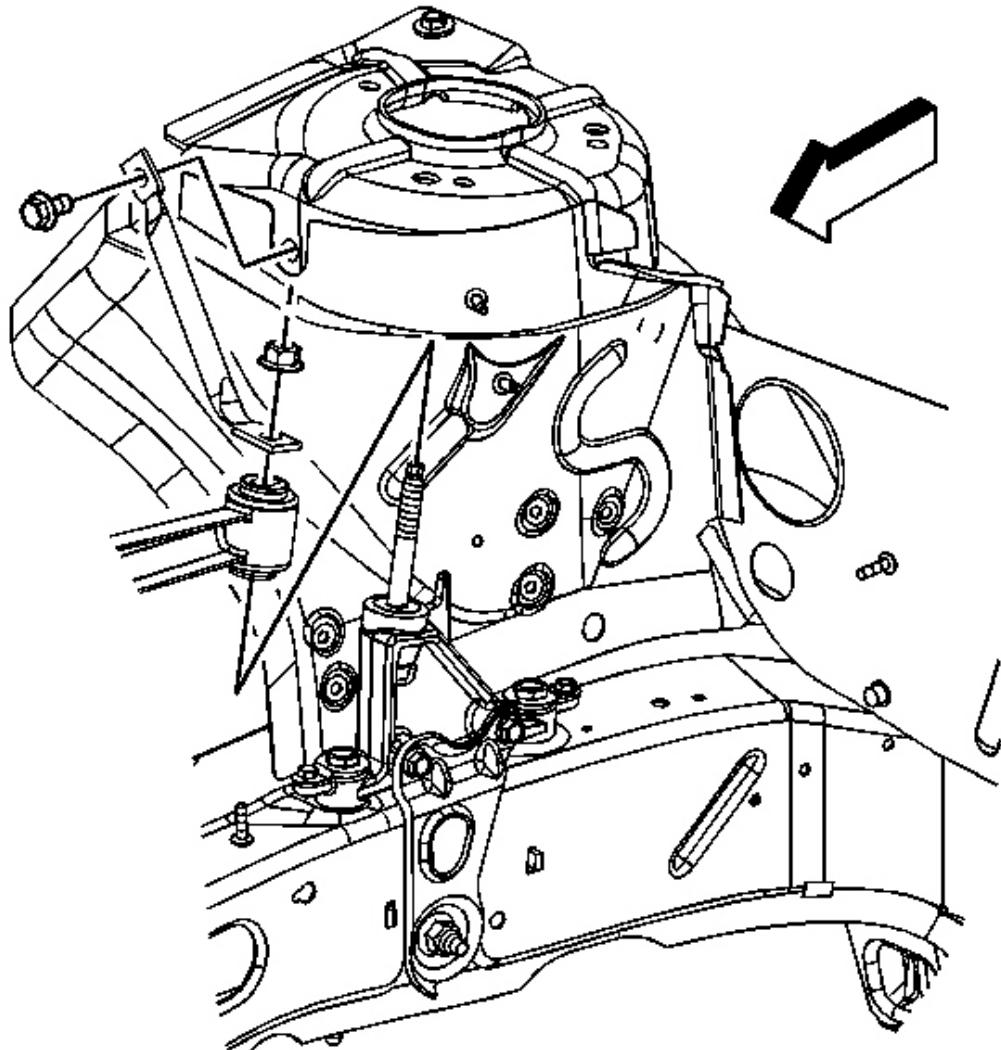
Identifying Engine Mount Strut Bolt
